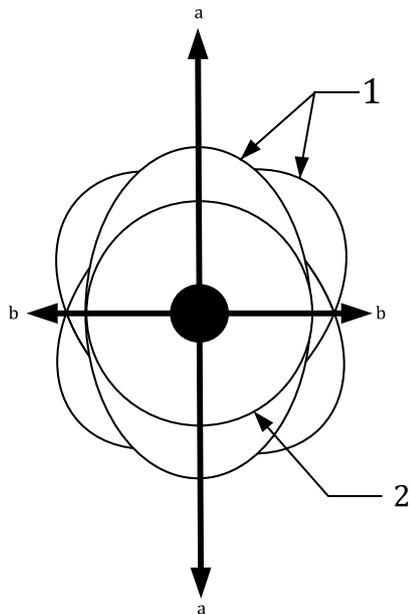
Example of a calibrated upper thread plug gauge (thread failed)
